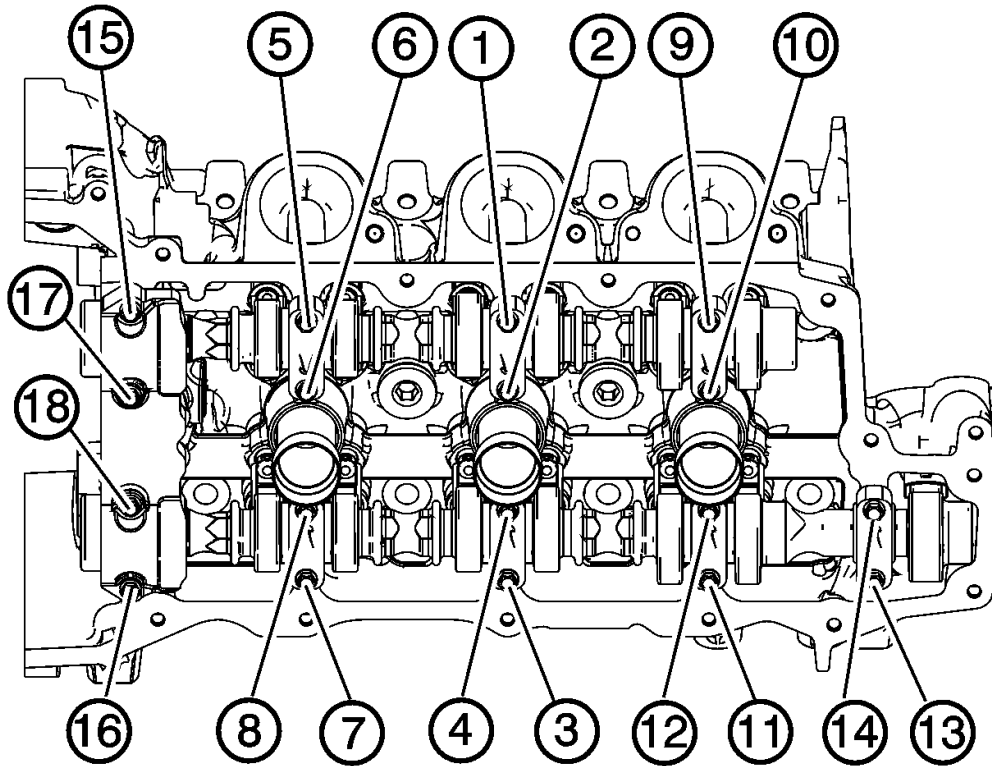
Identifying Camshaft Bearing Cap Bolt Tightening Sequence
